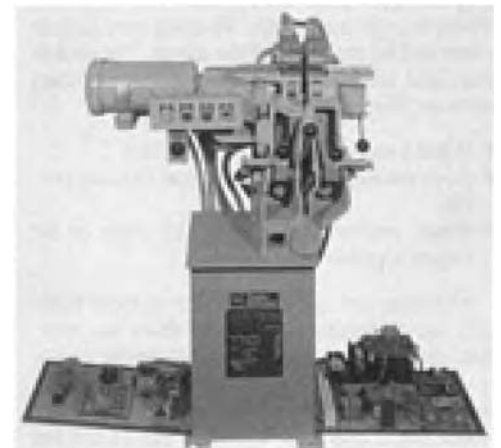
Flash-welding machine installation equipped to weld band-saw blades
